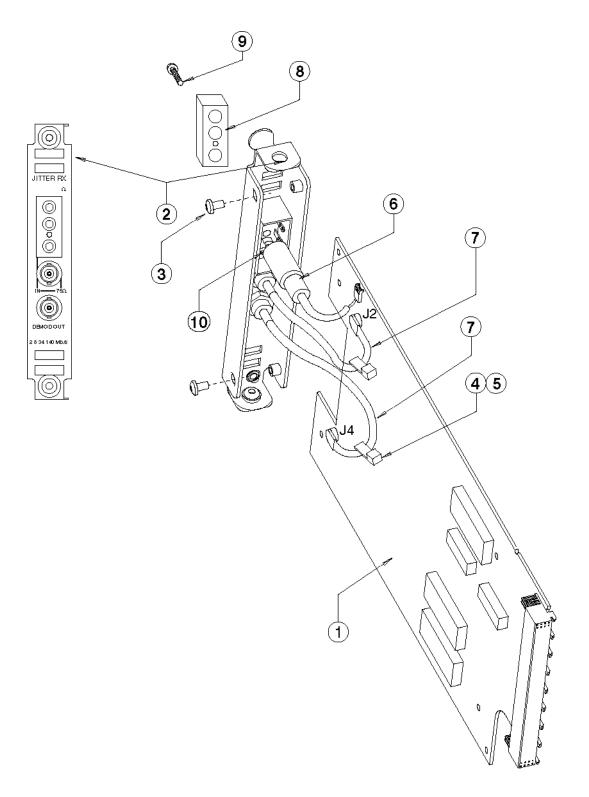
Option UHN Jitter Rx Module - Exploded View
